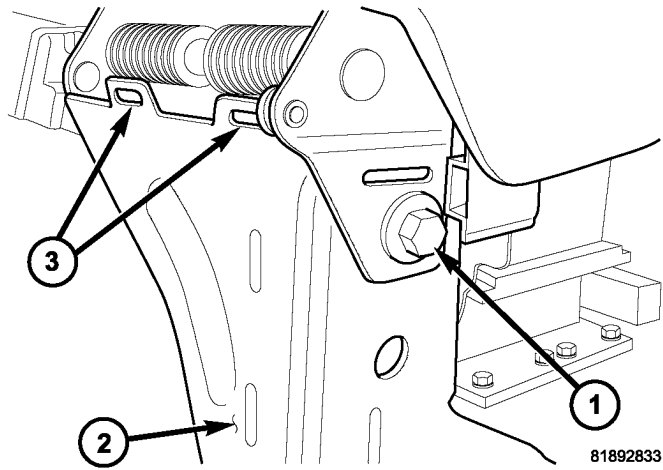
OUTBOARD TUMBLE MECHANISM BOLT
